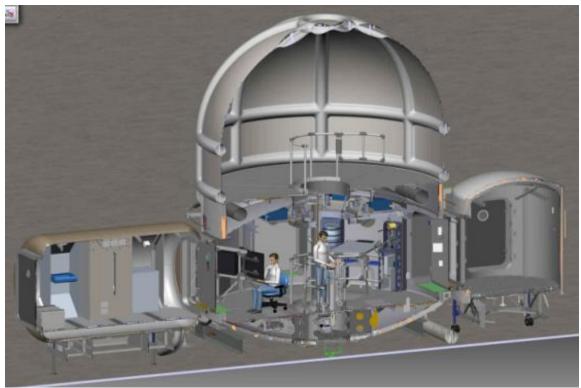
CAD Integration Cross-Section View of HDU-DSH
